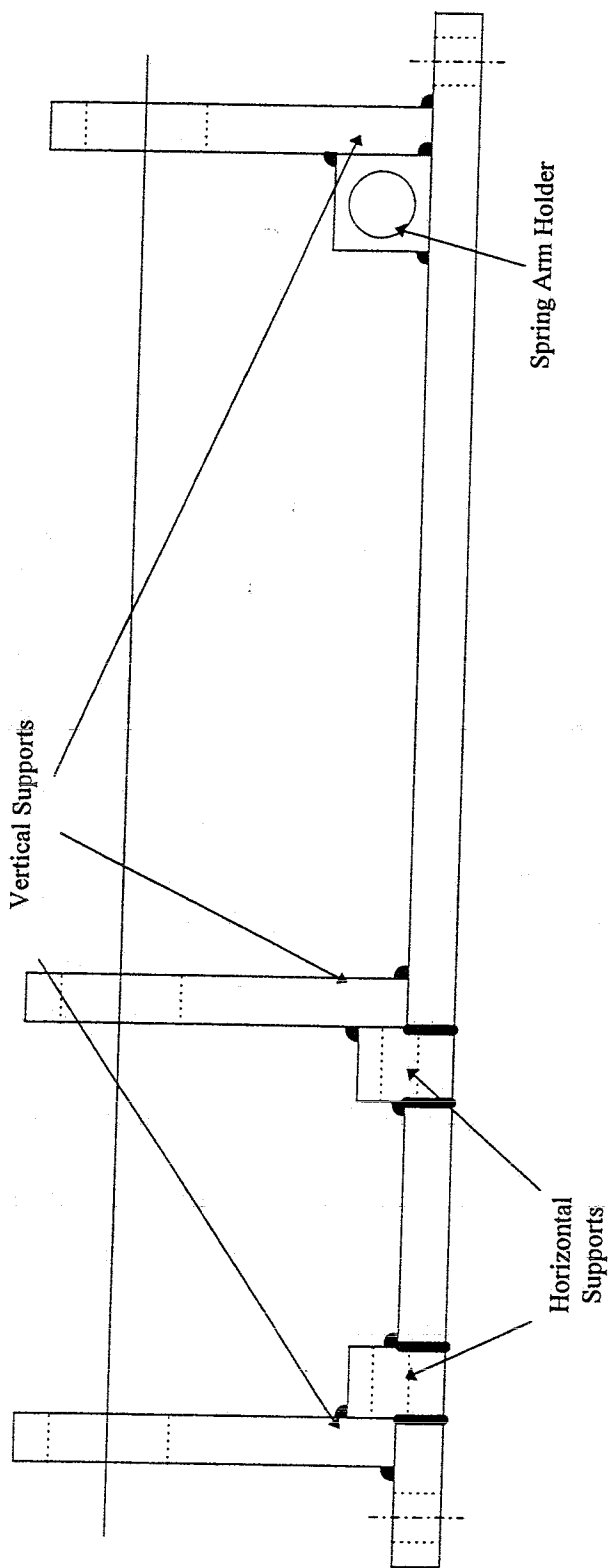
Welds Required to Attach Vertical Supports and Spring Arm Holder to Baseplate (Front View)
